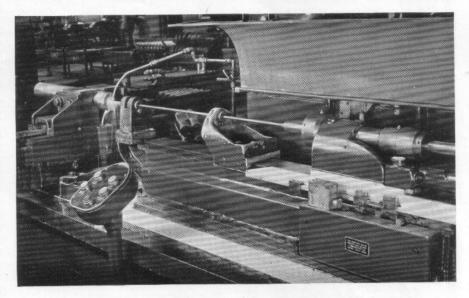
Working at 490 r.p.m. and .064 in. per rev. feed, this Archdale deep hole drilling machine is drilling a 1 in. B.S.P.T. tapping hole 12 in. deep in a short steel shaft.
